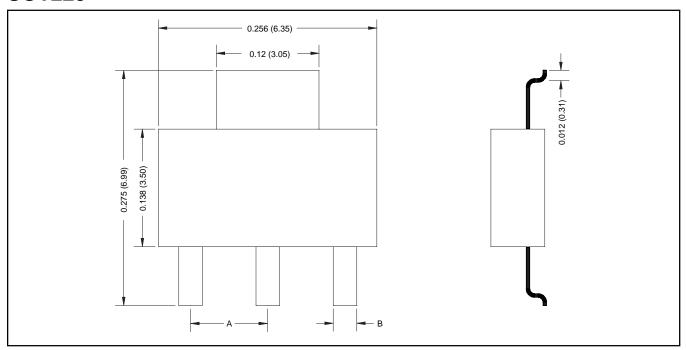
SOT223 Package Dimensions—Inches (mm).
